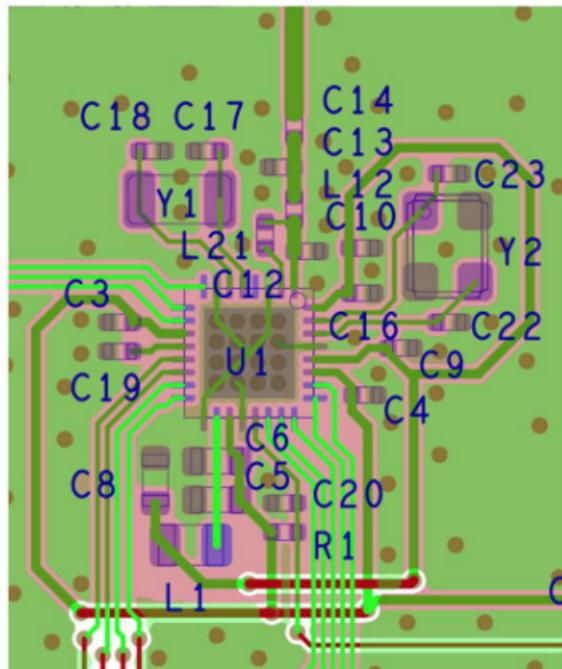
4 × 4 External Single-ended (4XS) Layout
